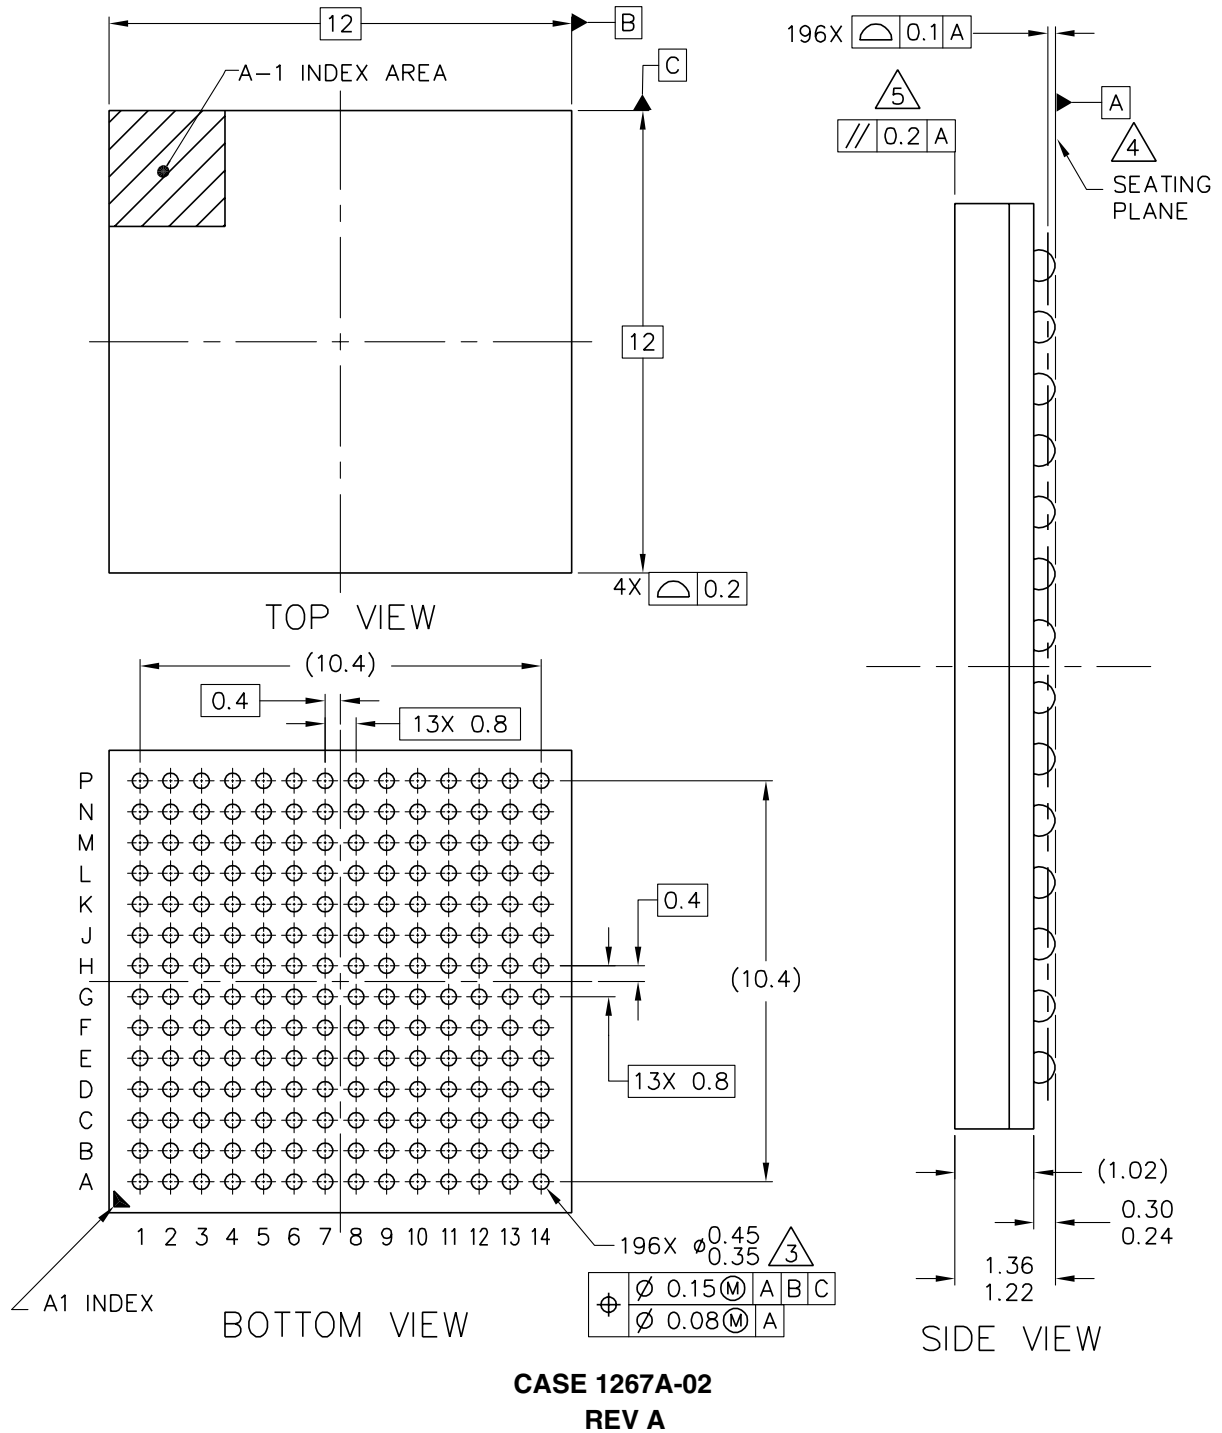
MC68SZ328 MAPBGA Mechanical Drawing (Sheet 1 of 2)
